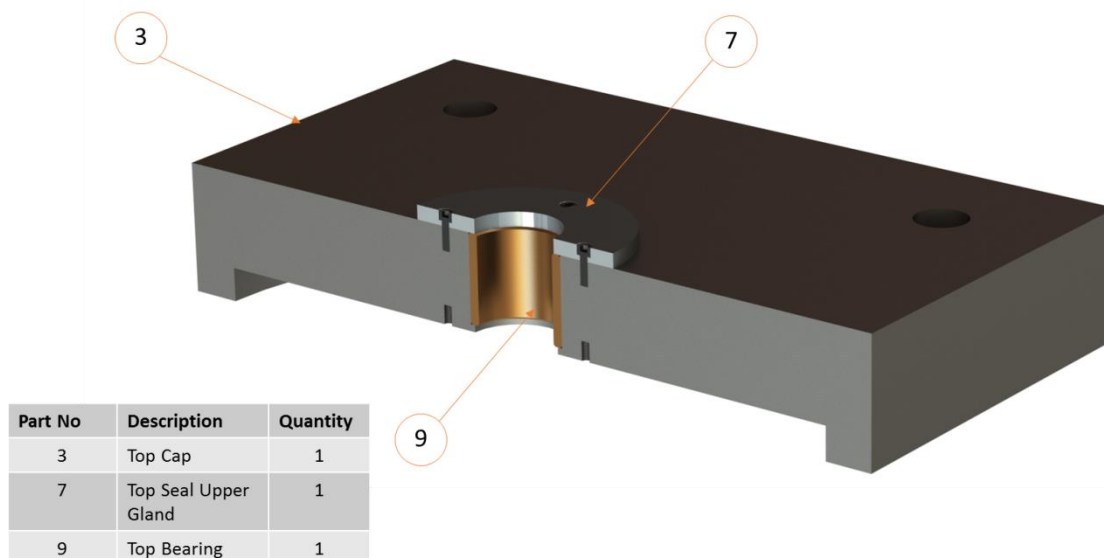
Step 2: Install the top seal upper gland (the top bearing was already press-fitted).
